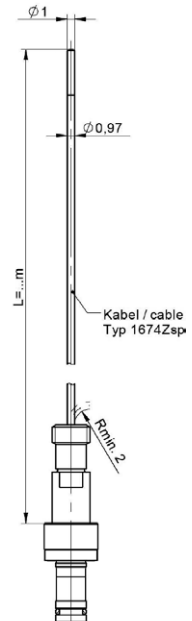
Sensor Typ 6177B with single-wire cable and crimp pin
